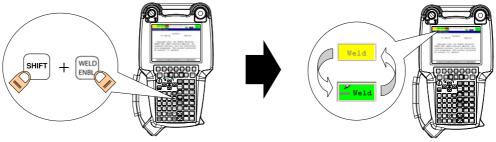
(b) Switching Operation of Weld Enabled/Disabled by WELD ENBL Key
